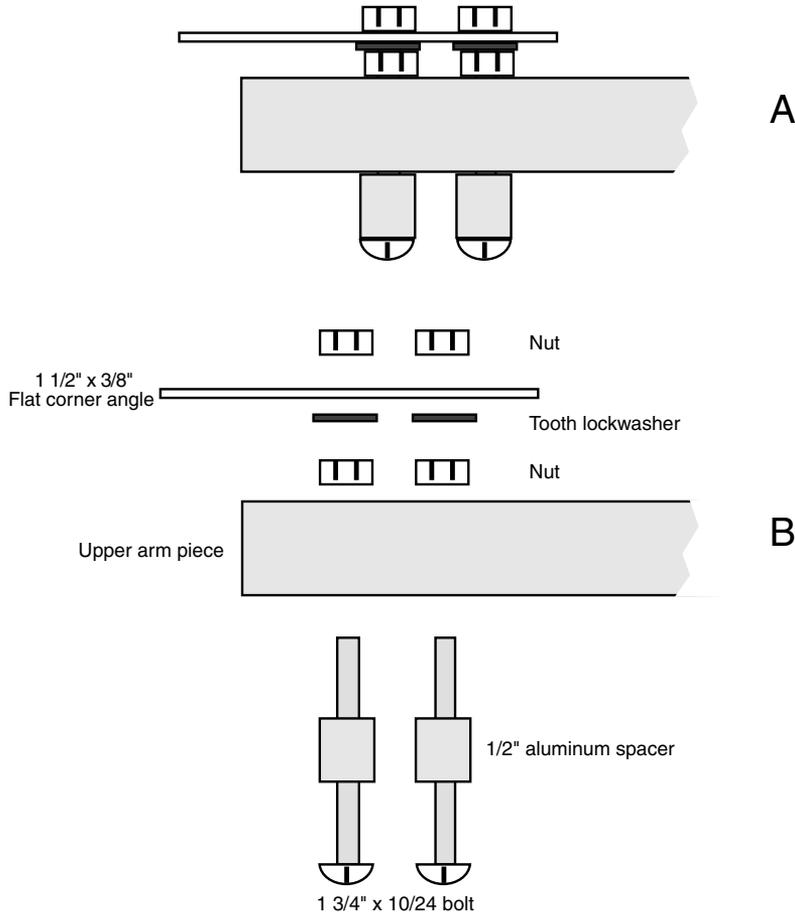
Shoulder shaft detail. *a.* Completed shaft; *b.* Exploded view.
